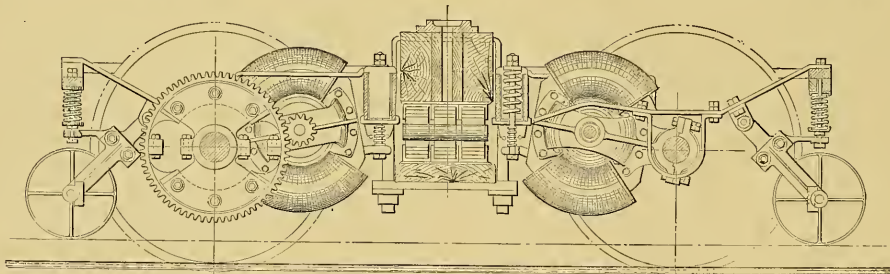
ELECTRIC RAILWAY TRUCK—ELEVATION.
